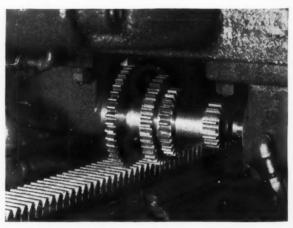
Shaving the large 43tooth gear of the cluster on the Michigan rack machine. Chucking is automatic. gears in the transmission are held within 0.002 inch runout after shaving, when rolled with master gears.
